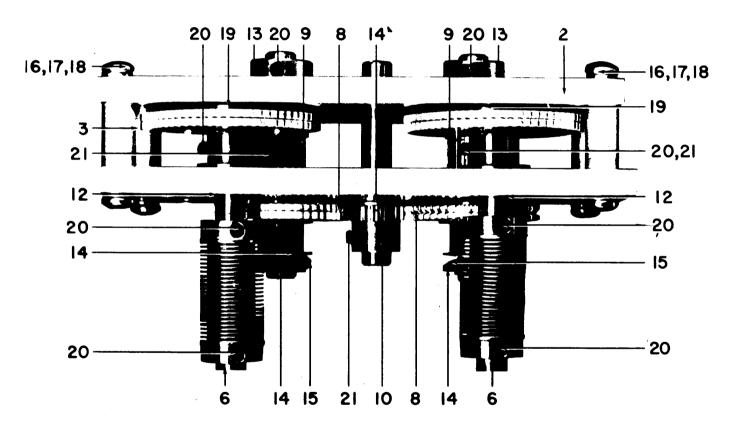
Type 85132 Tuning Drive (A3), Location of Components
